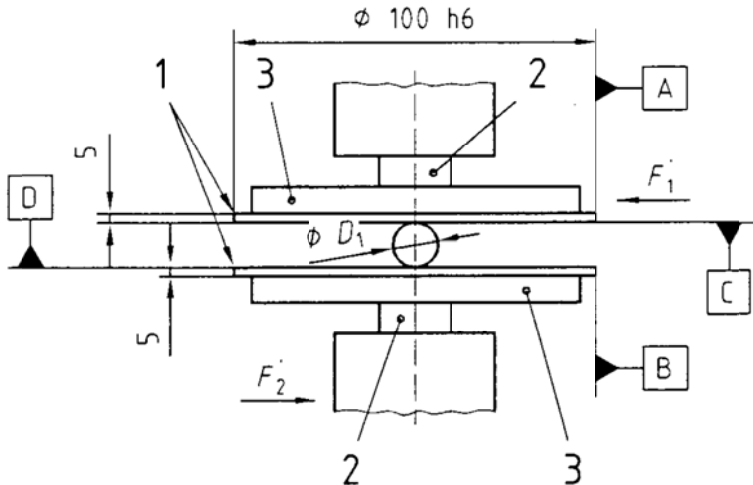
Measurement accessory for spot welding equipment (ISO 669)
